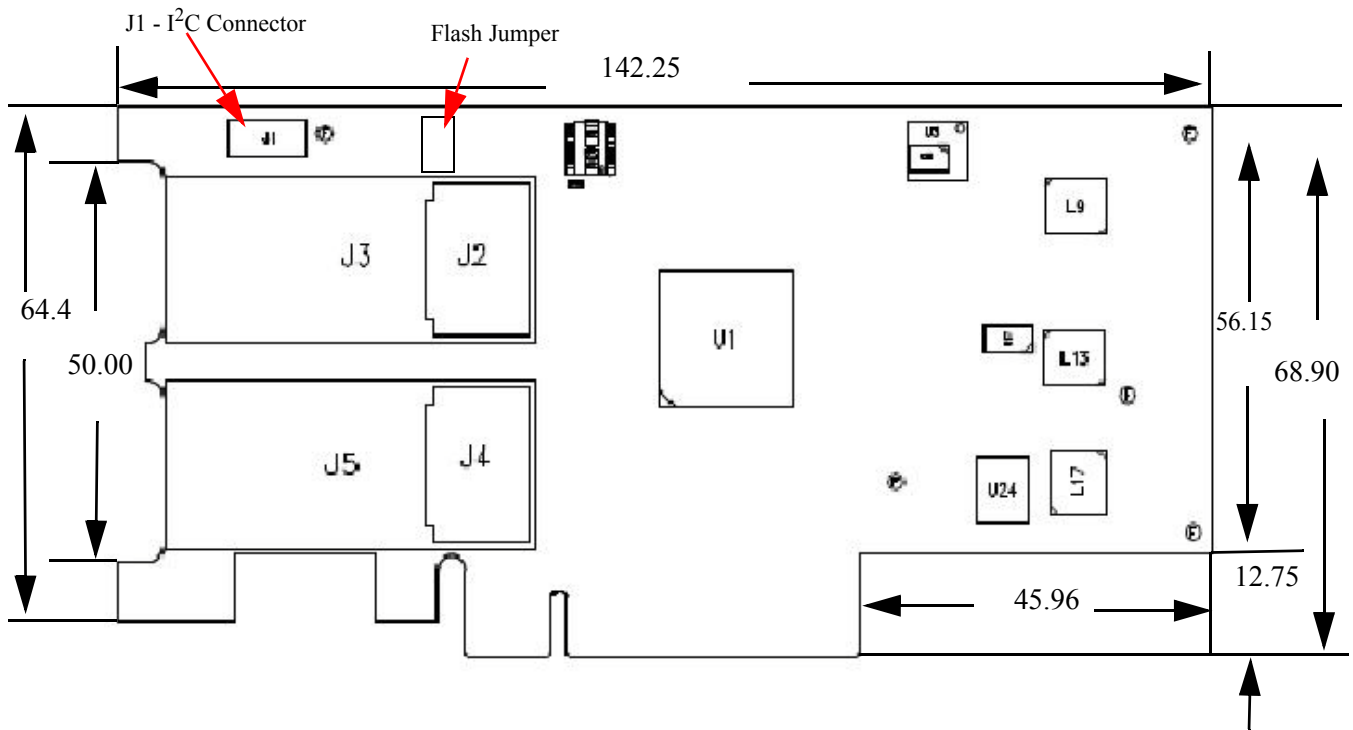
Mechanical Drawing of the Dual-port MCX354A-[QFT]CBT Adapter Card
